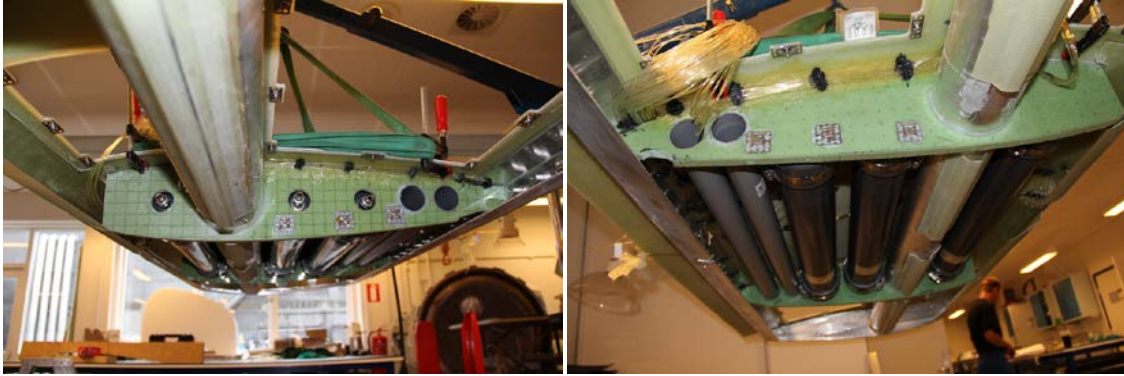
Left: Preparation of aluminium part. Right: Placement of adhesive in the marked bond lines using a glue gun.
